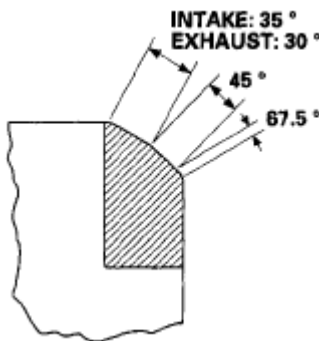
Identifying Bevel Upper And Lower Edges Angles
